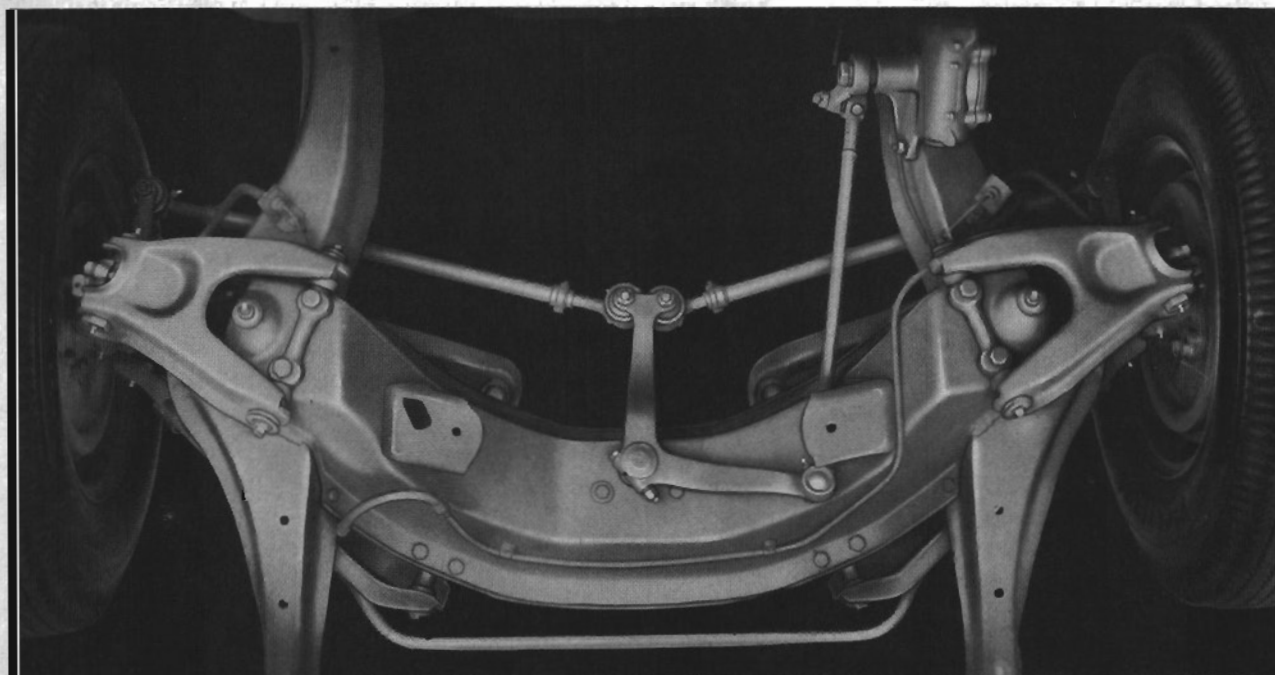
TOP VIEW OF FRONT SUSPENSION
